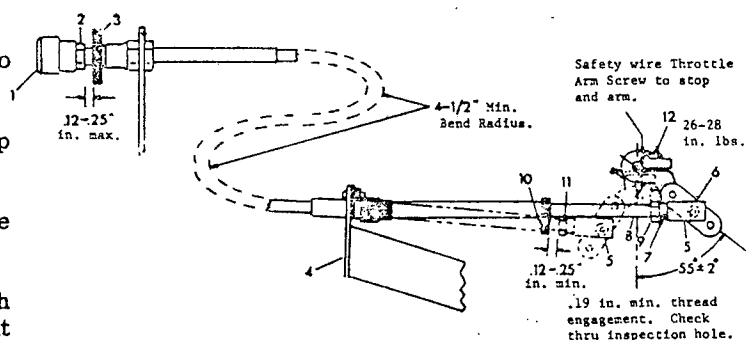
CARBURETOR THROTTLE ARM AND CABLE RIGGING
